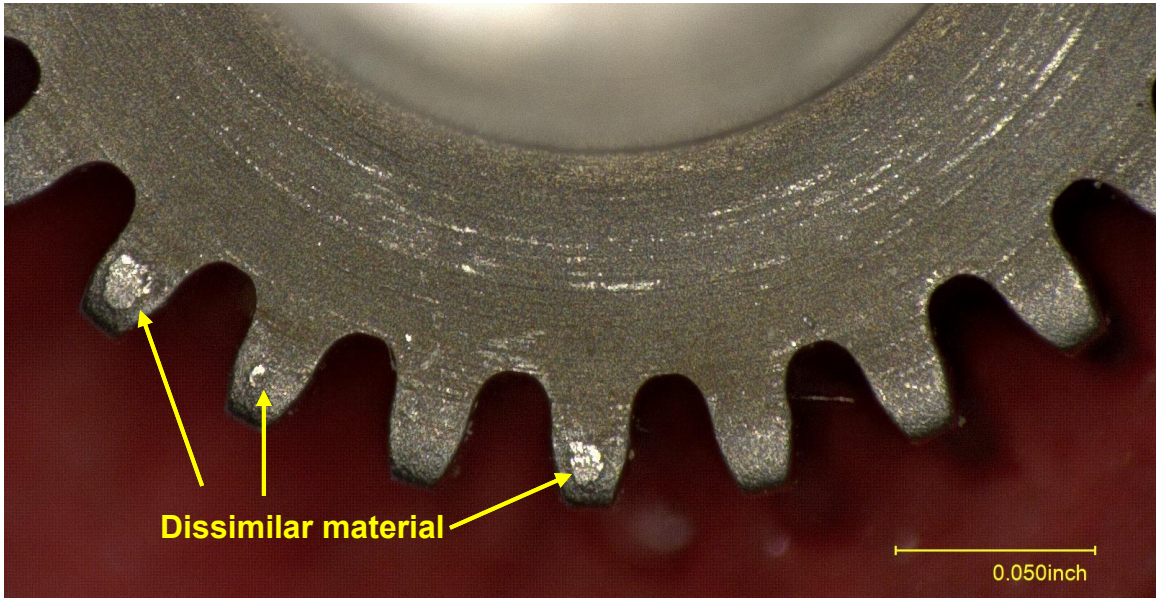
The gear teeth of the output gearshaft, as viewed from above. Some areas of foreign material were found on the teeth faces.
